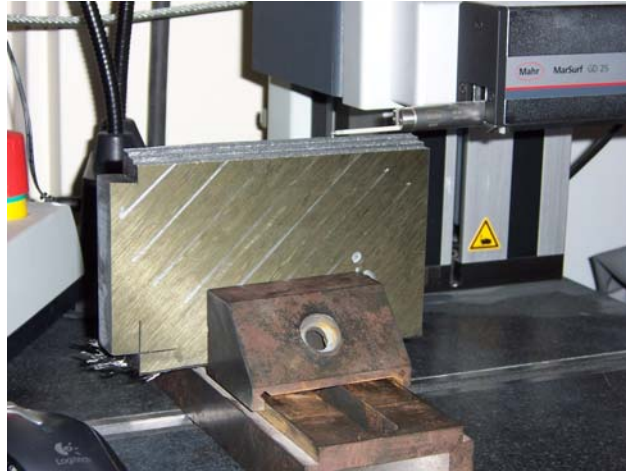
Surface profilometry measurements for dust collection workpieces.
